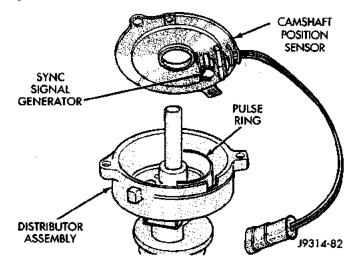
Distributor and Camshaft Position Sensor (Typical Sensor Shown)
